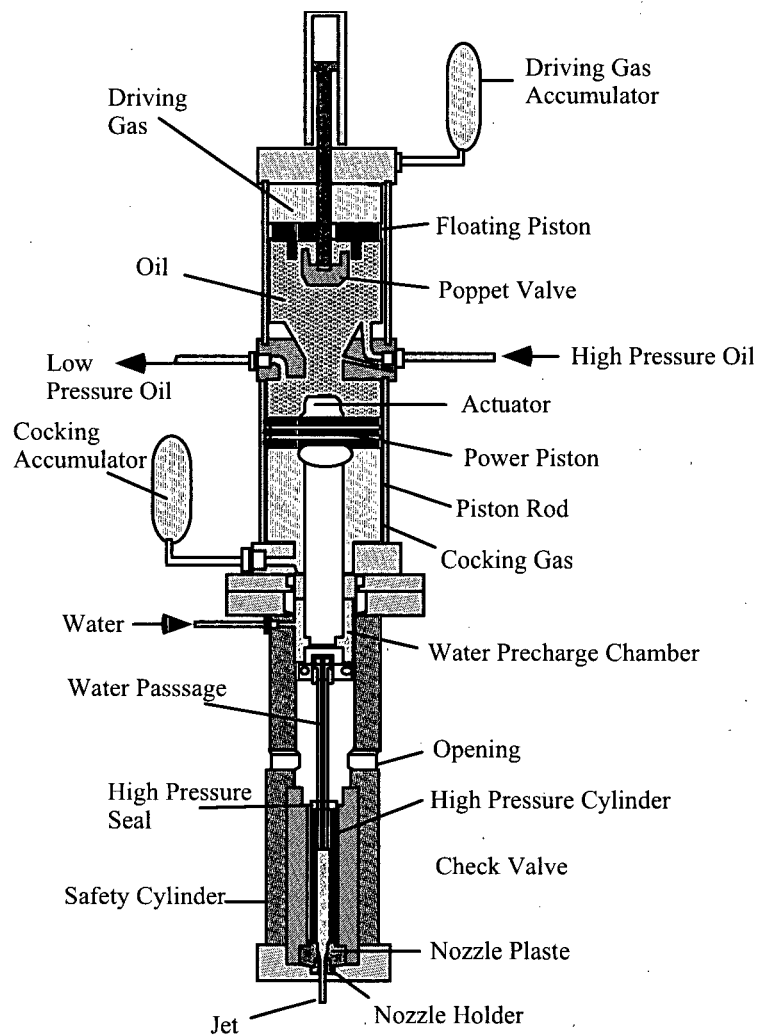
Design of a gas driven pulsation unit for concrete breaking [5.79].
